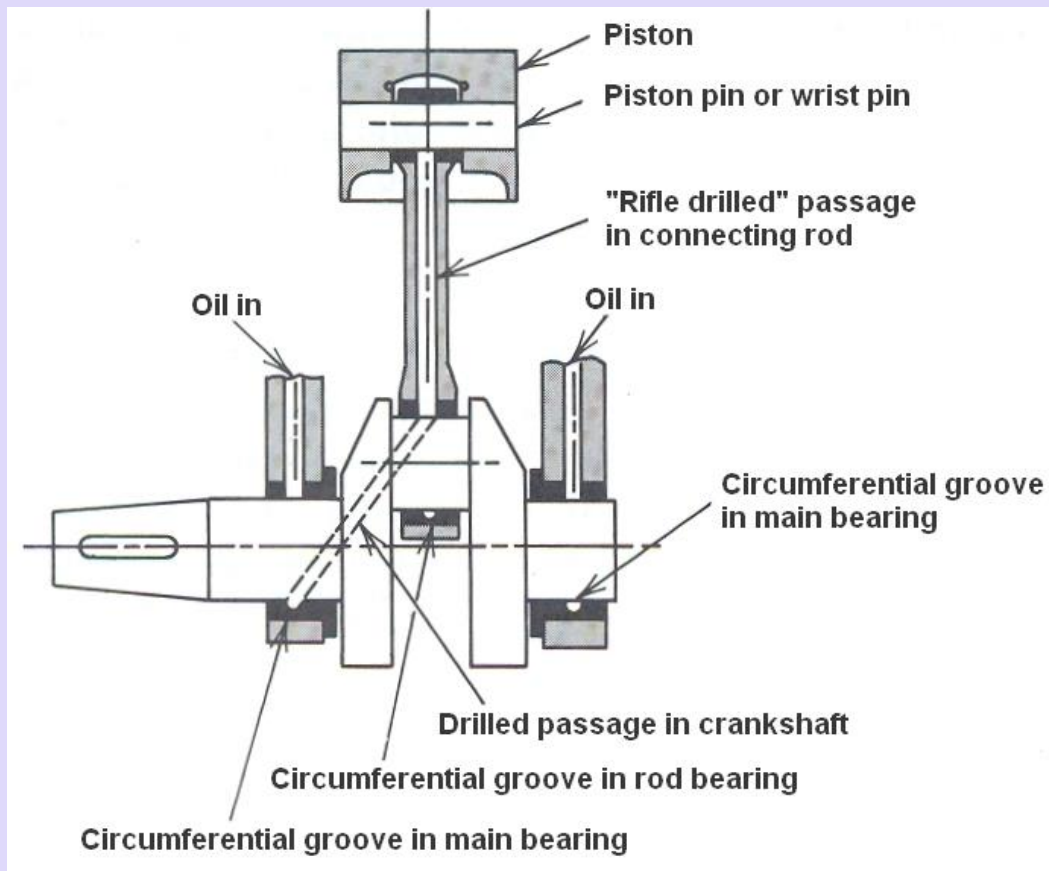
Oil pump lubrication of an engine crank shaft
